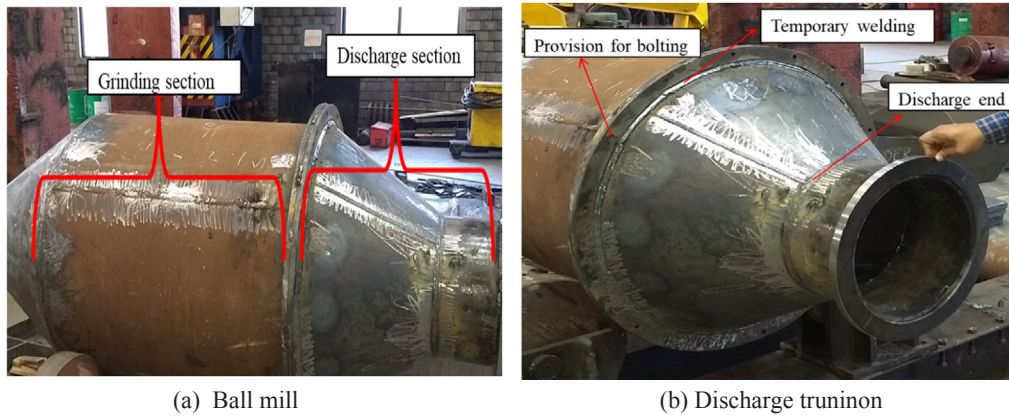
(a) & (b). Ball mill with newly fabricated discharge end.
